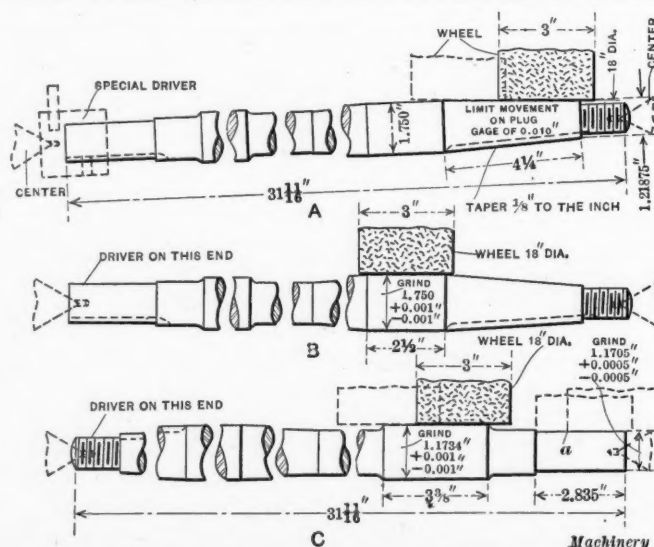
Grinding a Rear Axle Shaft for an Automobile by Means of "Straight-in" and Traverse Method of Grinding
